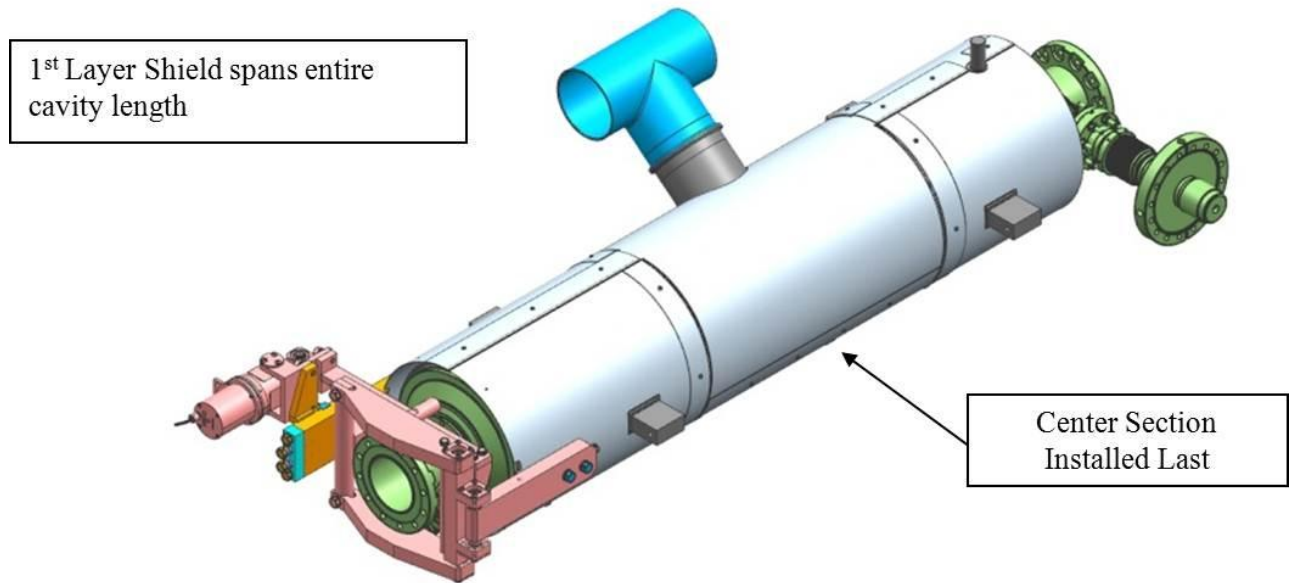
Cavity Complete with 1<sup>st</sup> layer Magnetic Shielding
